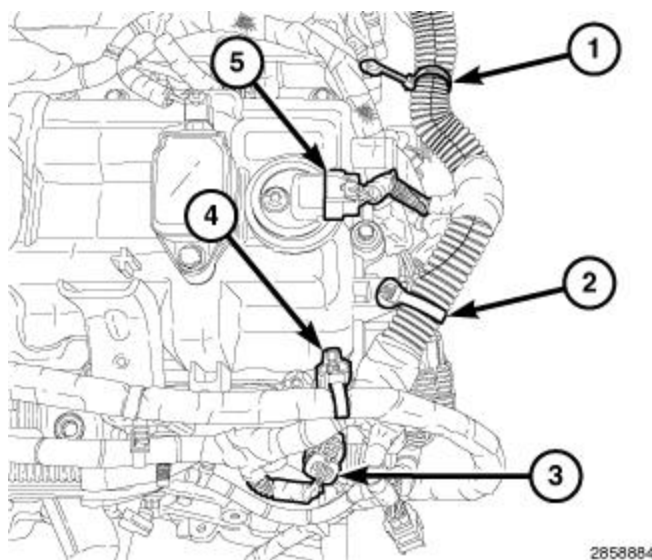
ECT Sensor Connector, CMP Sensor & Main Wire Harness Retainers
